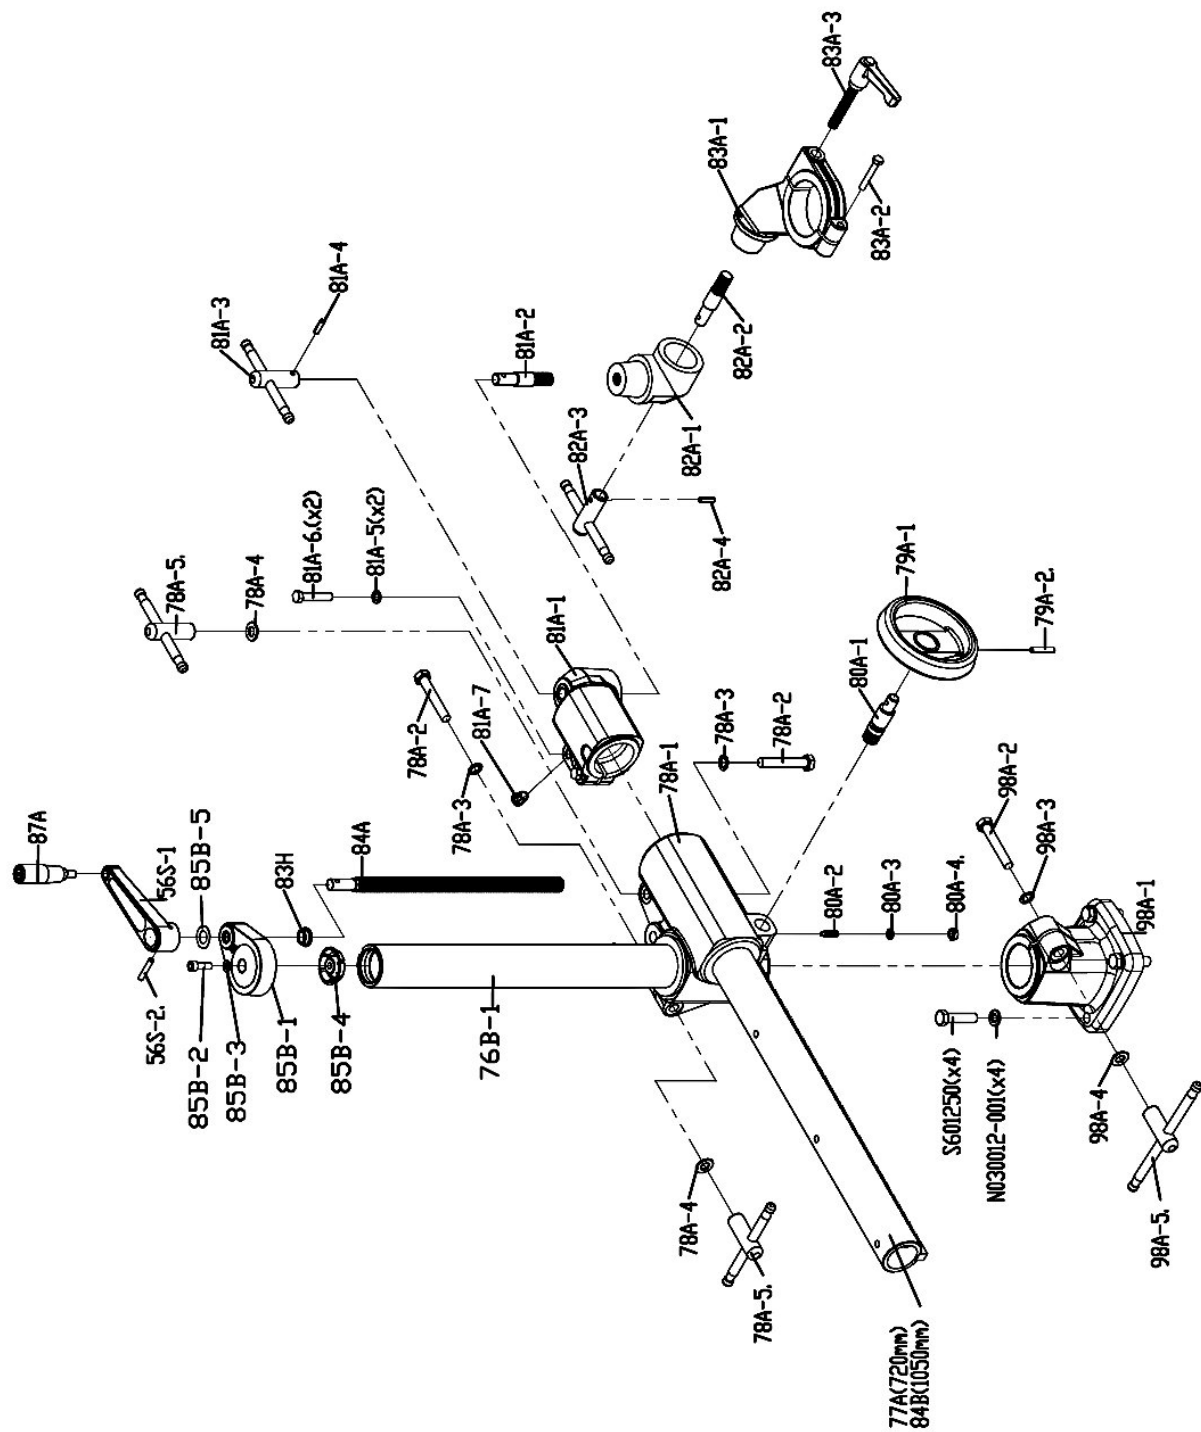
Spare parts drawing 2 - tripod of feed unit VSA 48 EL
